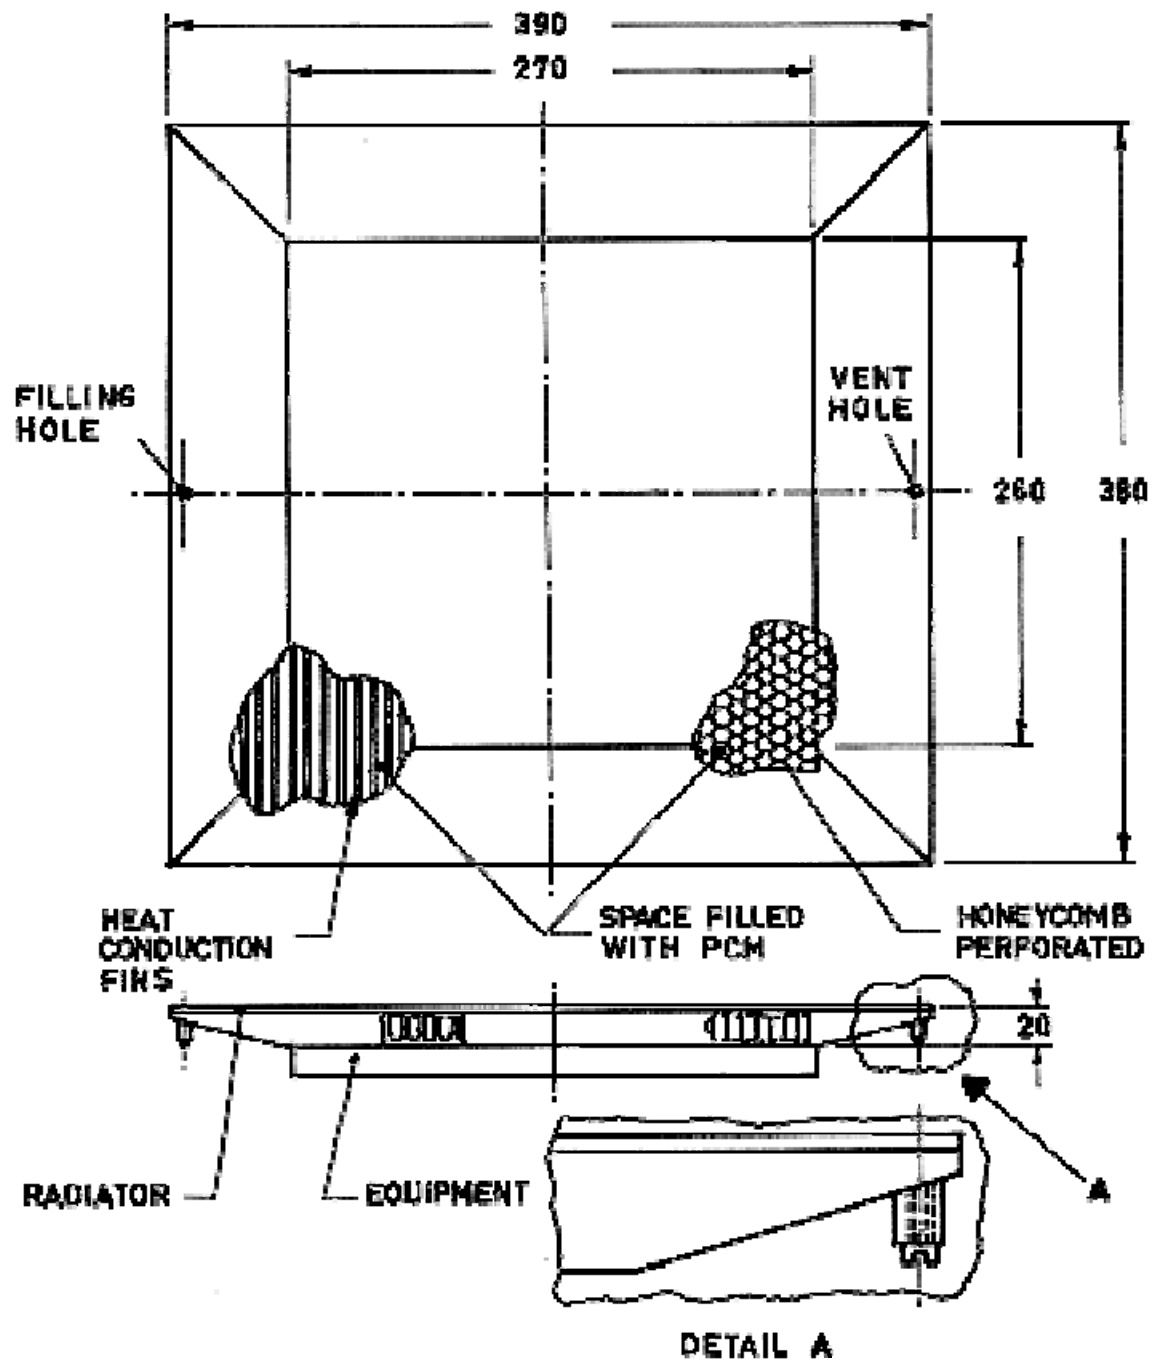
Machined wall container profile with top and bottom adhesive bonded. Alternative filler types are honeycomb or honeycomb plus fins. All the dimensions are in mm. From DORNIER SYSTEM (1972) [10].
